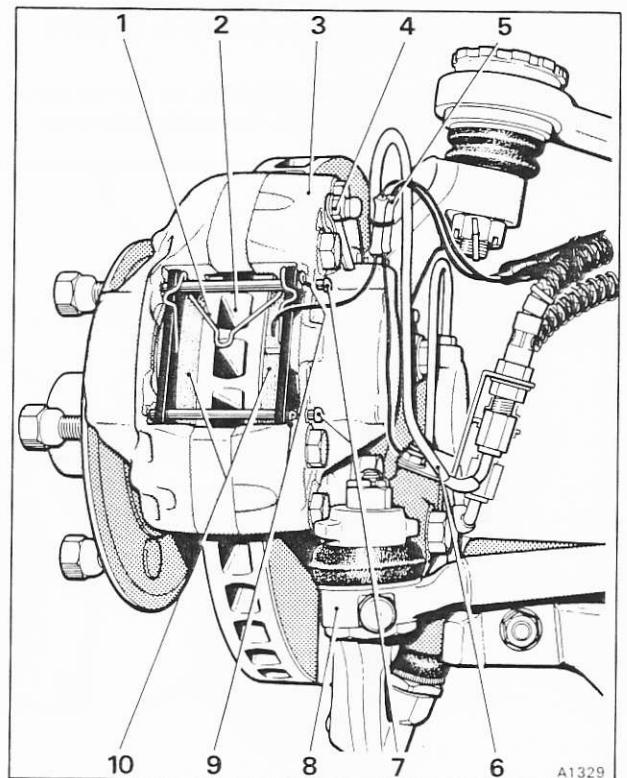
Front wheel brake caliper (cars not fitted with anti-lock braking)
